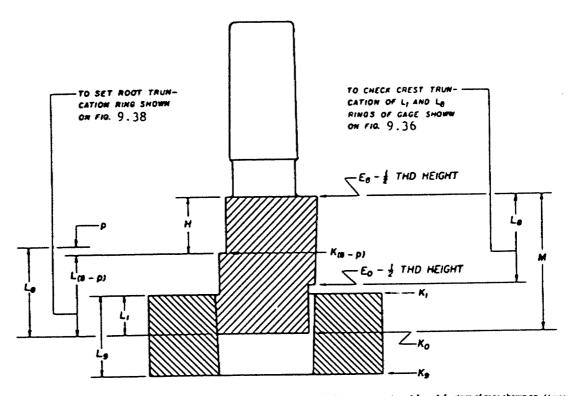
Master setting plug and ring gages for setting pitch diameter of threaded plug and ring gages; NGT, SGT.
